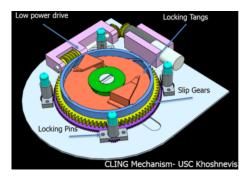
Original CLING-ERS Design: simple worm gear mechanism.
